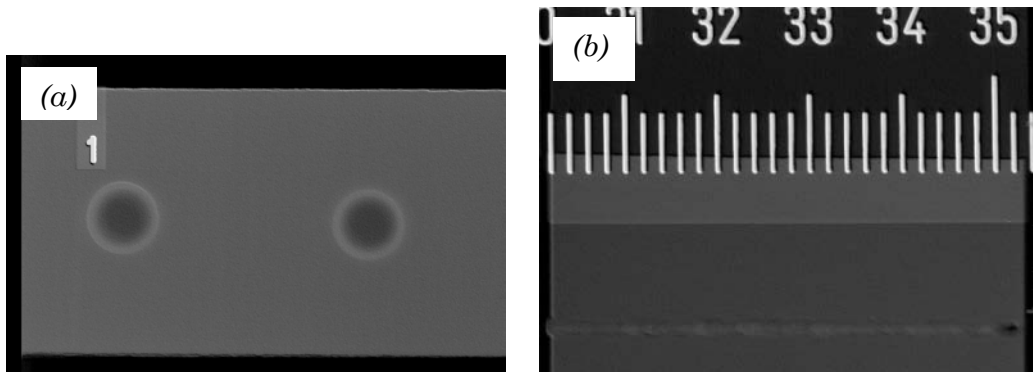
Laser weld (a) and resistance spot nuggets (b) from x-ray investigation
